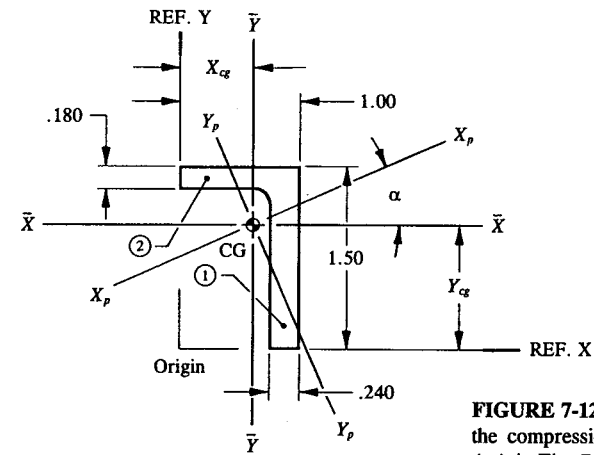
Cross-sectional area of the compression member (see Section A-A in Fig. 7-11).
